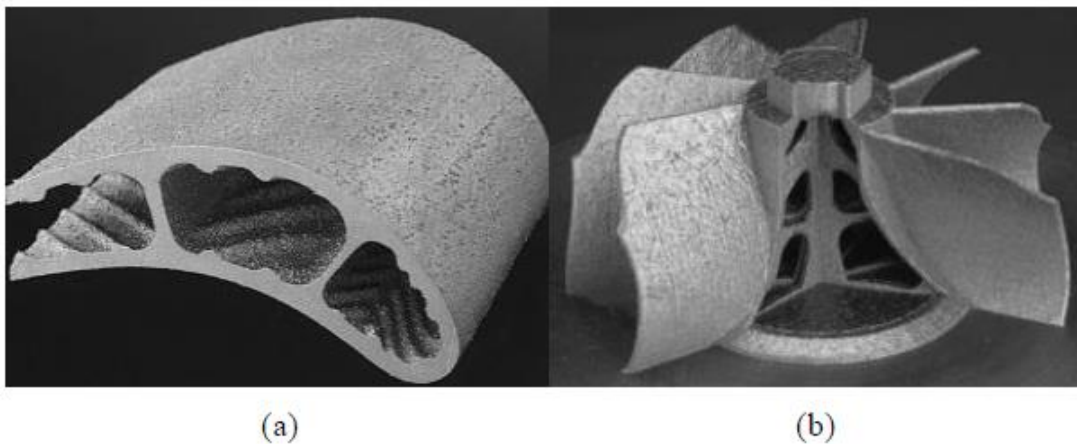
Aerospace elements manufactured by AM technology [16]: (a) Turbine blade, and (b) Blade integrated.
